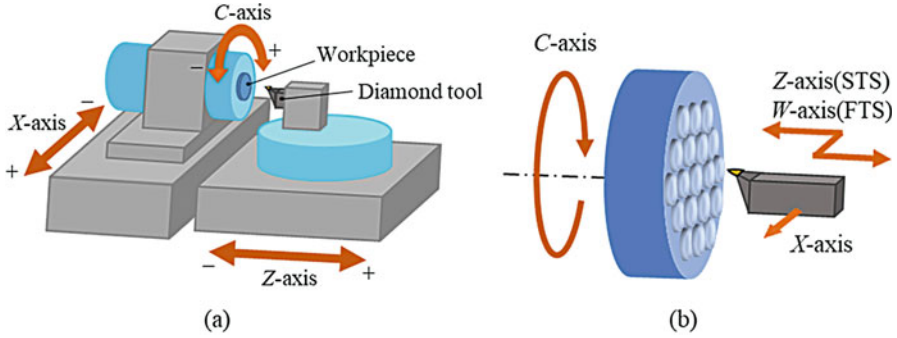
Schematic of tool-servo driven diamond turning: (a) lathe configuration; and (b) machining of structured surface
